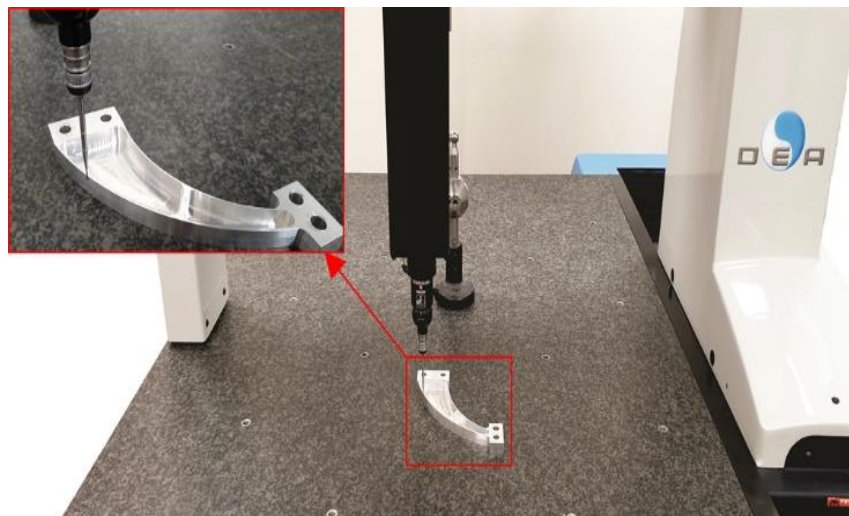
Measurement of part distortion on the coordinate measurement machine.
